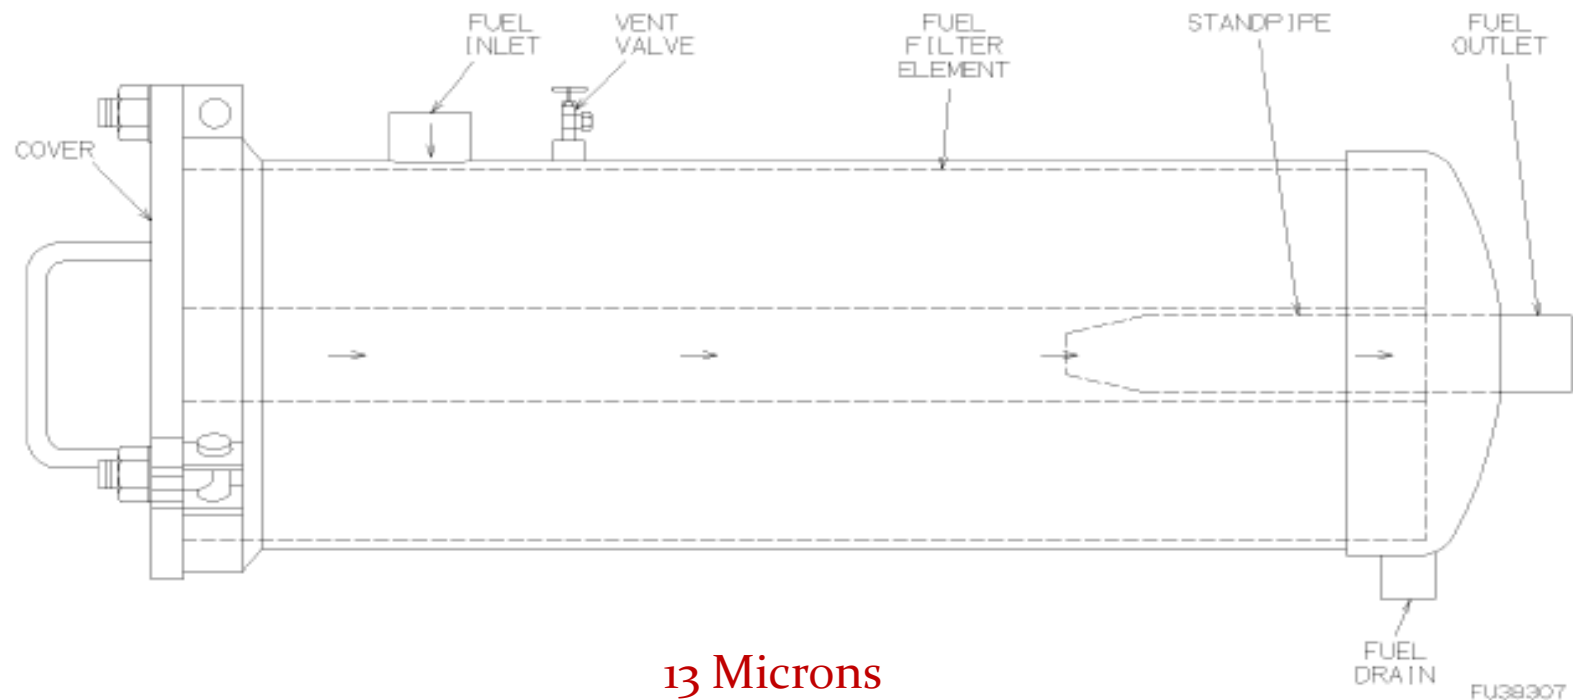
Single Canister - Primary Fuel Filter Assembly
